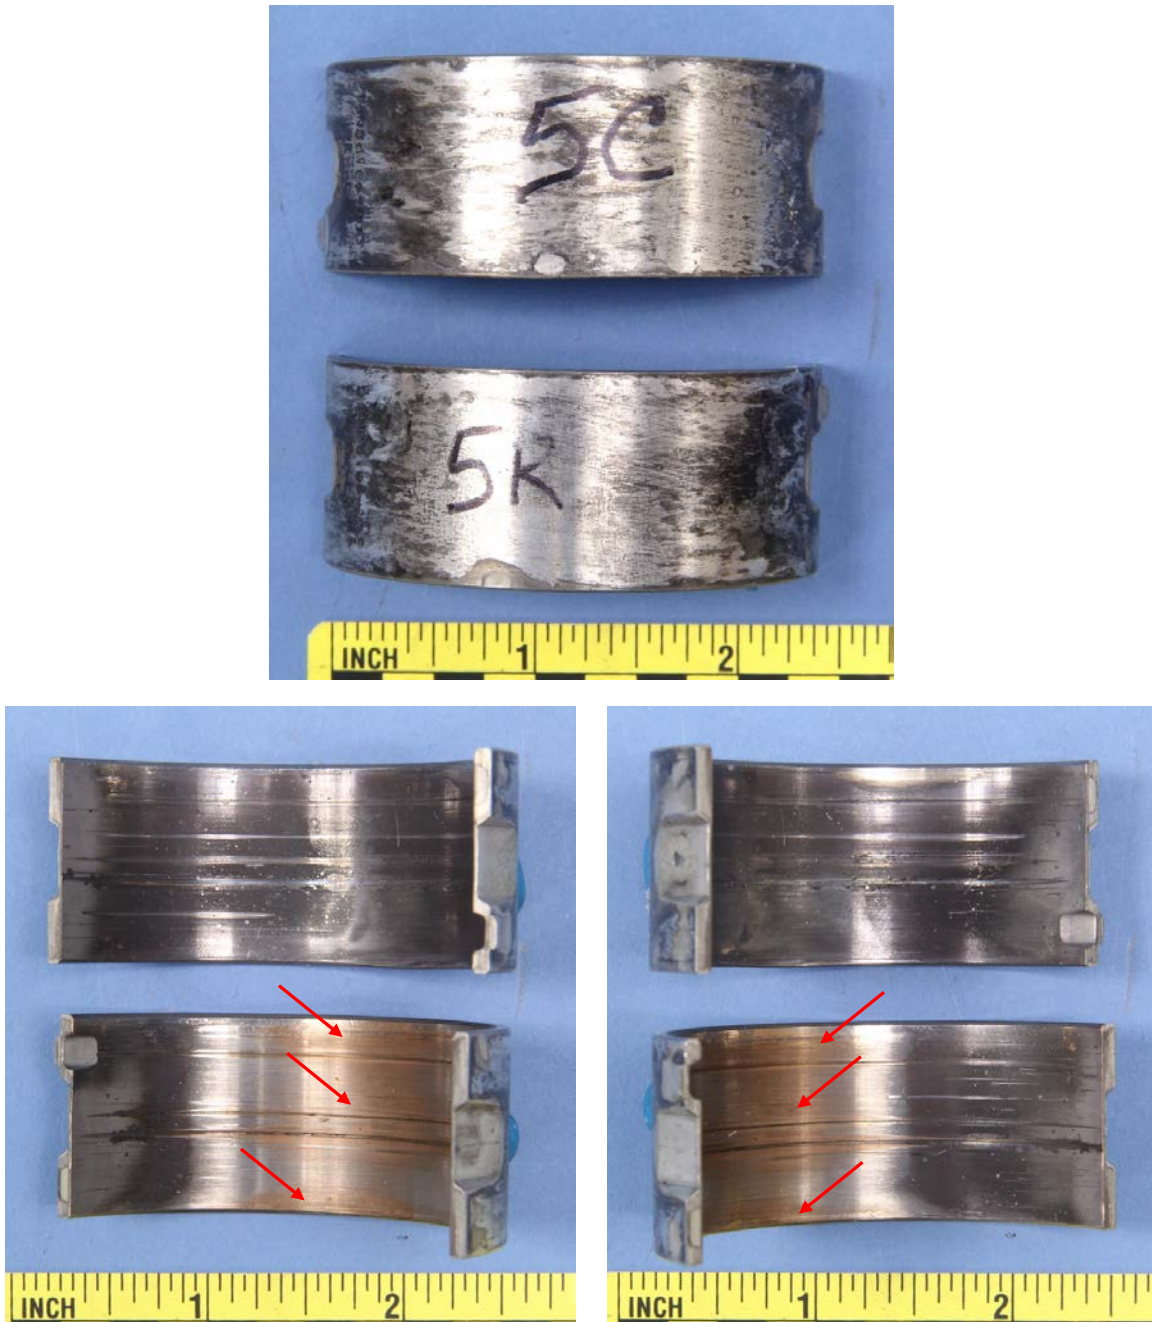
Overall photos of the connecting rod bearing. The red arrows point to areas on the ID of one bearing half where the Babbitt metal was worn through.
